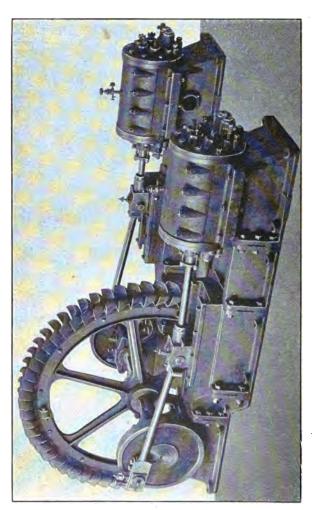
Class D.-Rix Duplex Sectional Shaft-driven Compressor. Manufactured by Fulton Engineering and Shighuilding Works, San Francisco.
